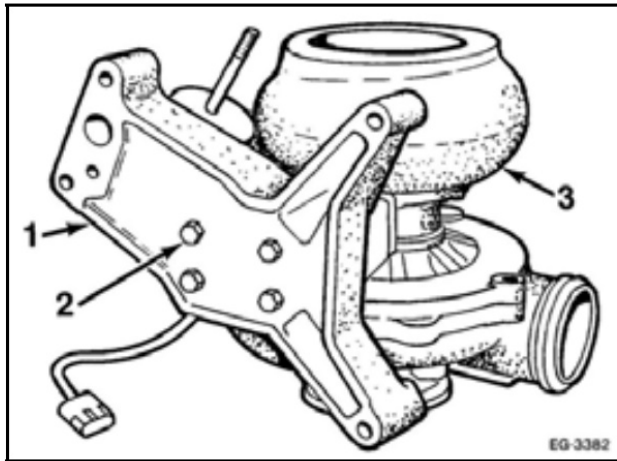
Removing Pedestal Mounting Bolts (Late 1997 Model Year Only)
